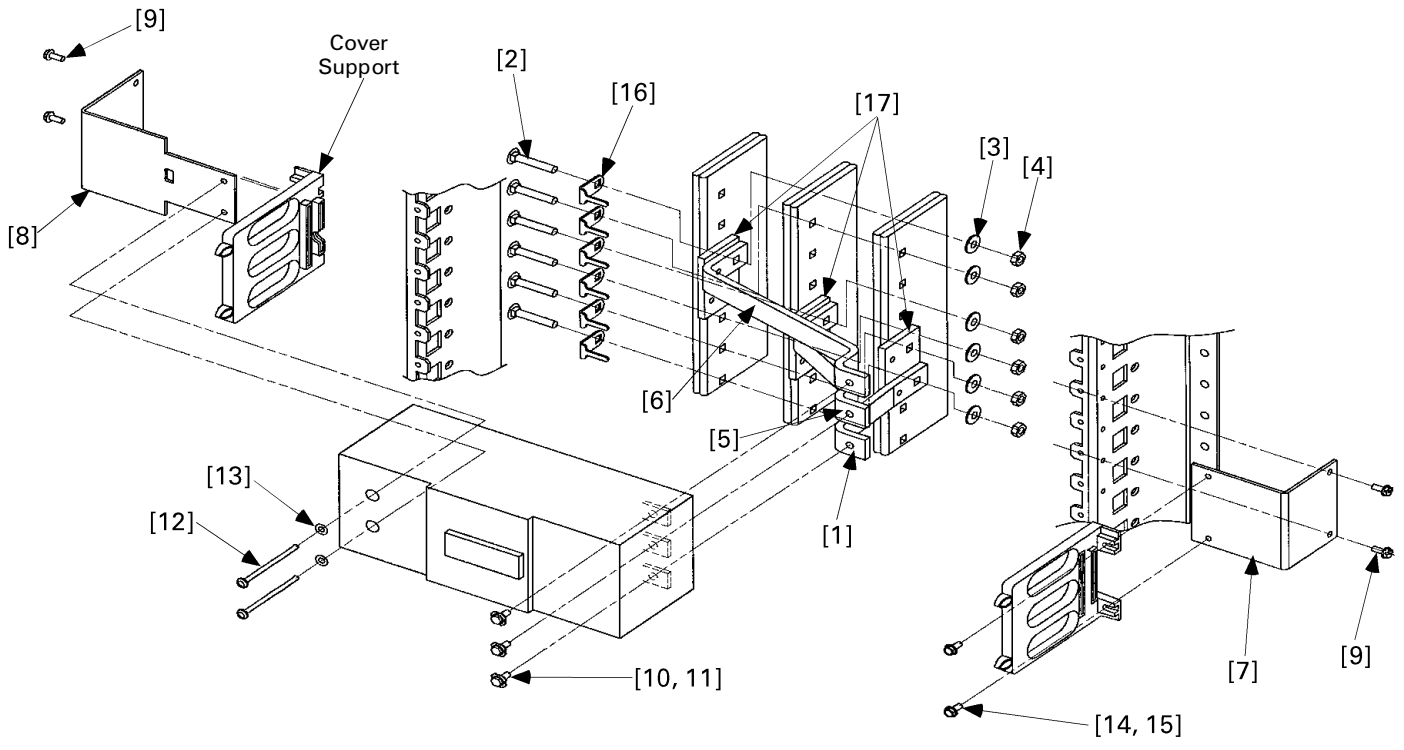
Single bolt-on circuit breaker assembly with spacers.
